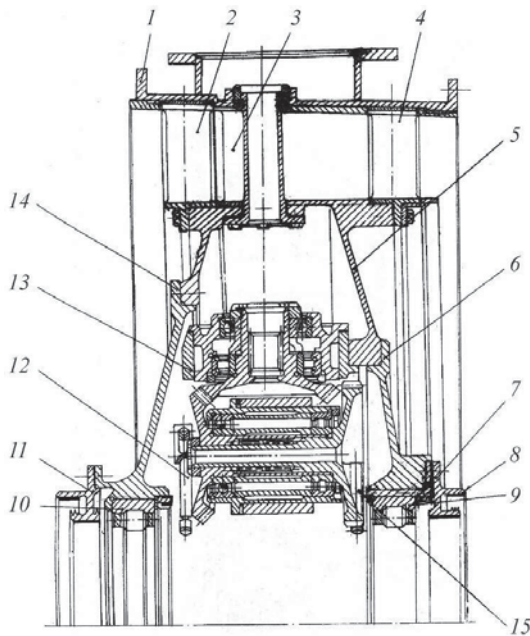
Adapter between compressors of the D050 engine [15]:
